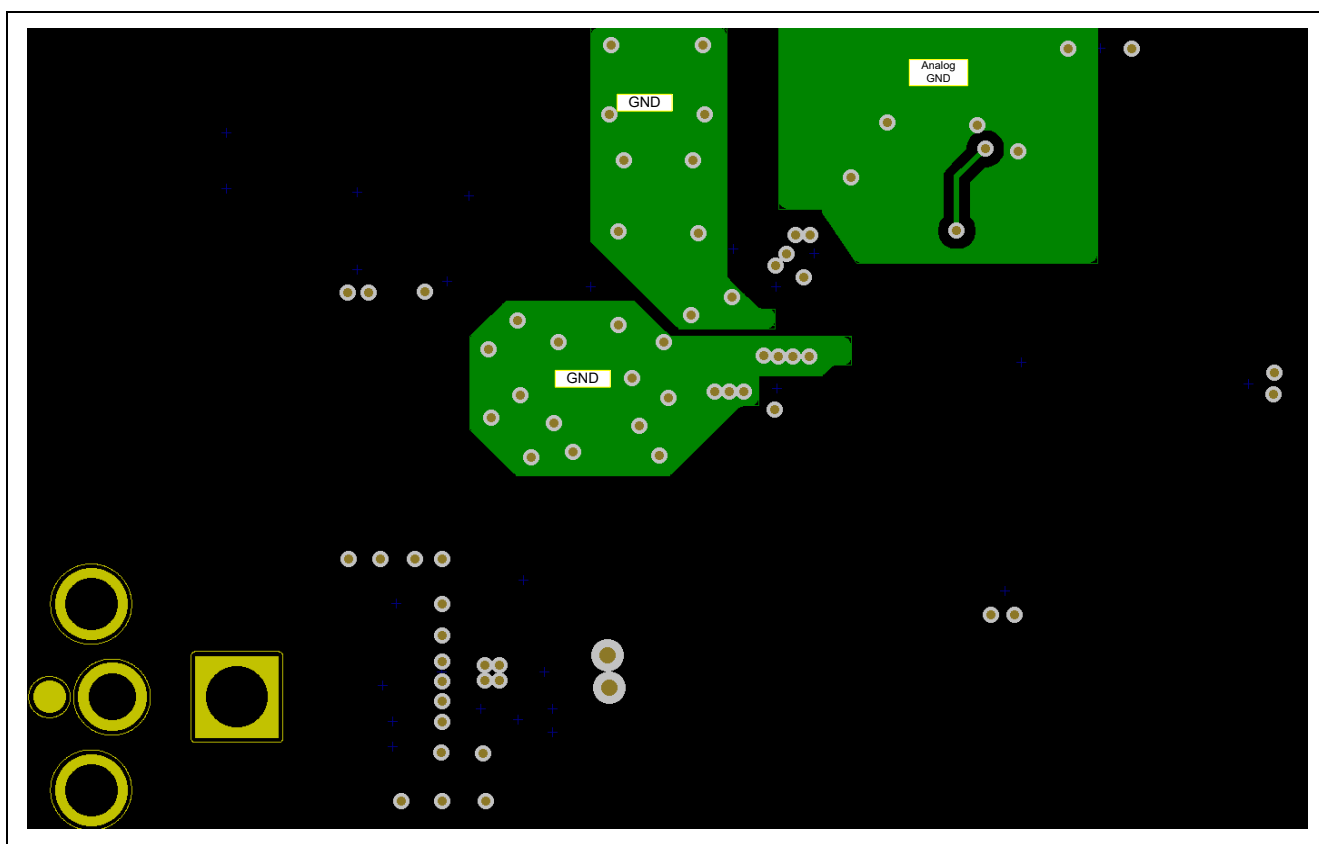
Example Board Wiring Pattern (Fourth Layer Wiring Pattern)
